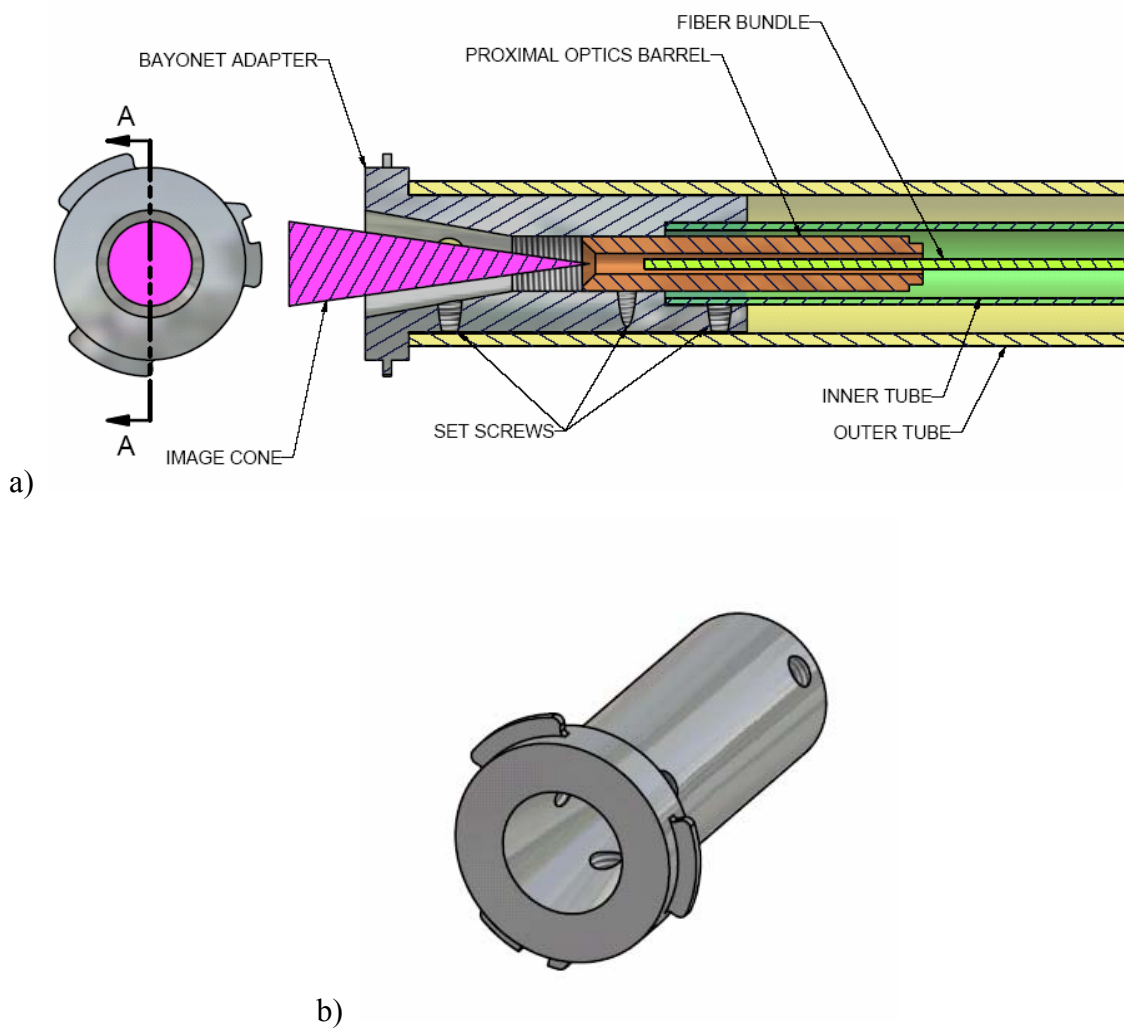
Proximal end design a) Section view of the distal end b) Bayonet adaptor
